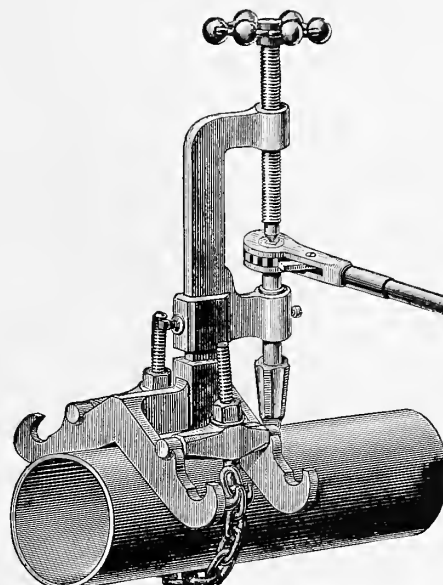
MUELLER GAS OR DRY MACHINE.
